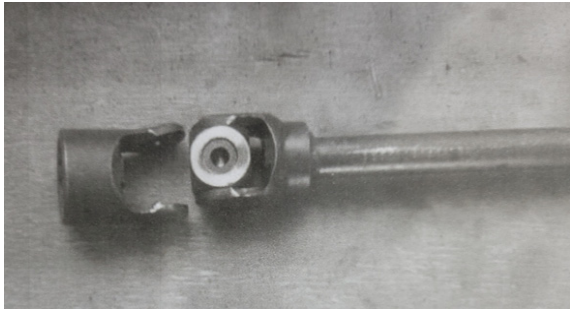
Fracture of special wrench(deformation and separation of lower socket)
